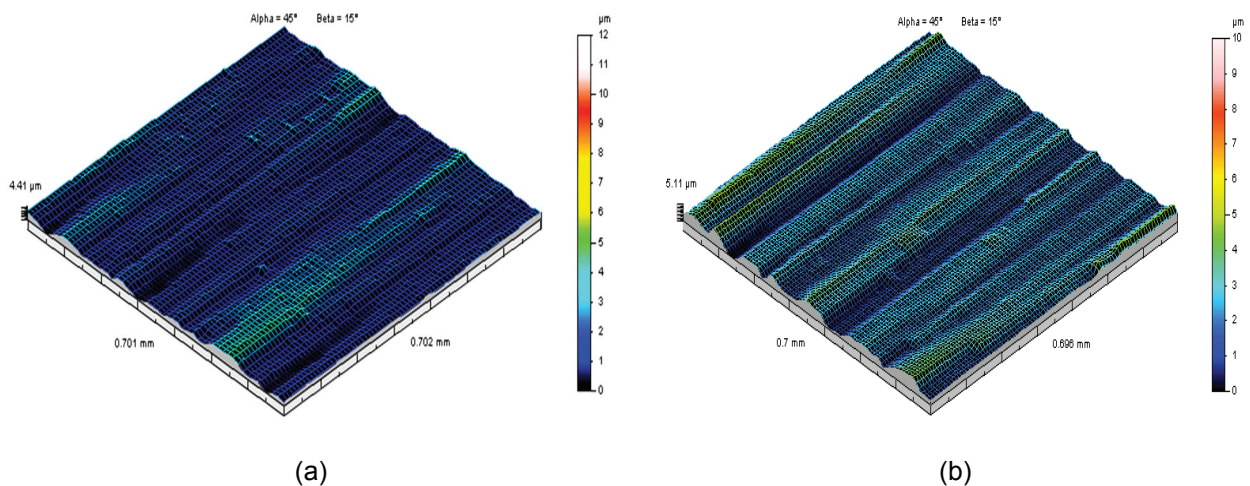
Surface texture after grinding with: a) multi-granular grinding wheel, b) single-granular grinding wheel
